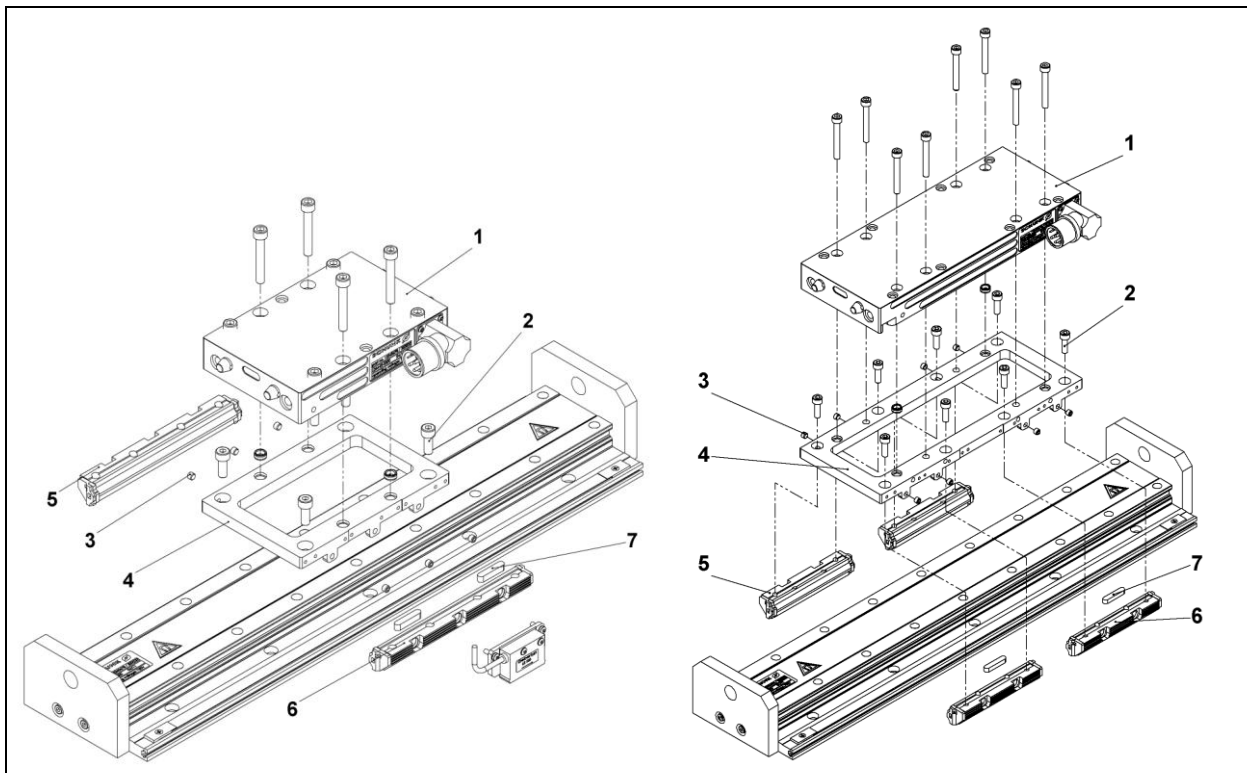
Changing the support rollers on locating bearing side of LDF-US-0100
